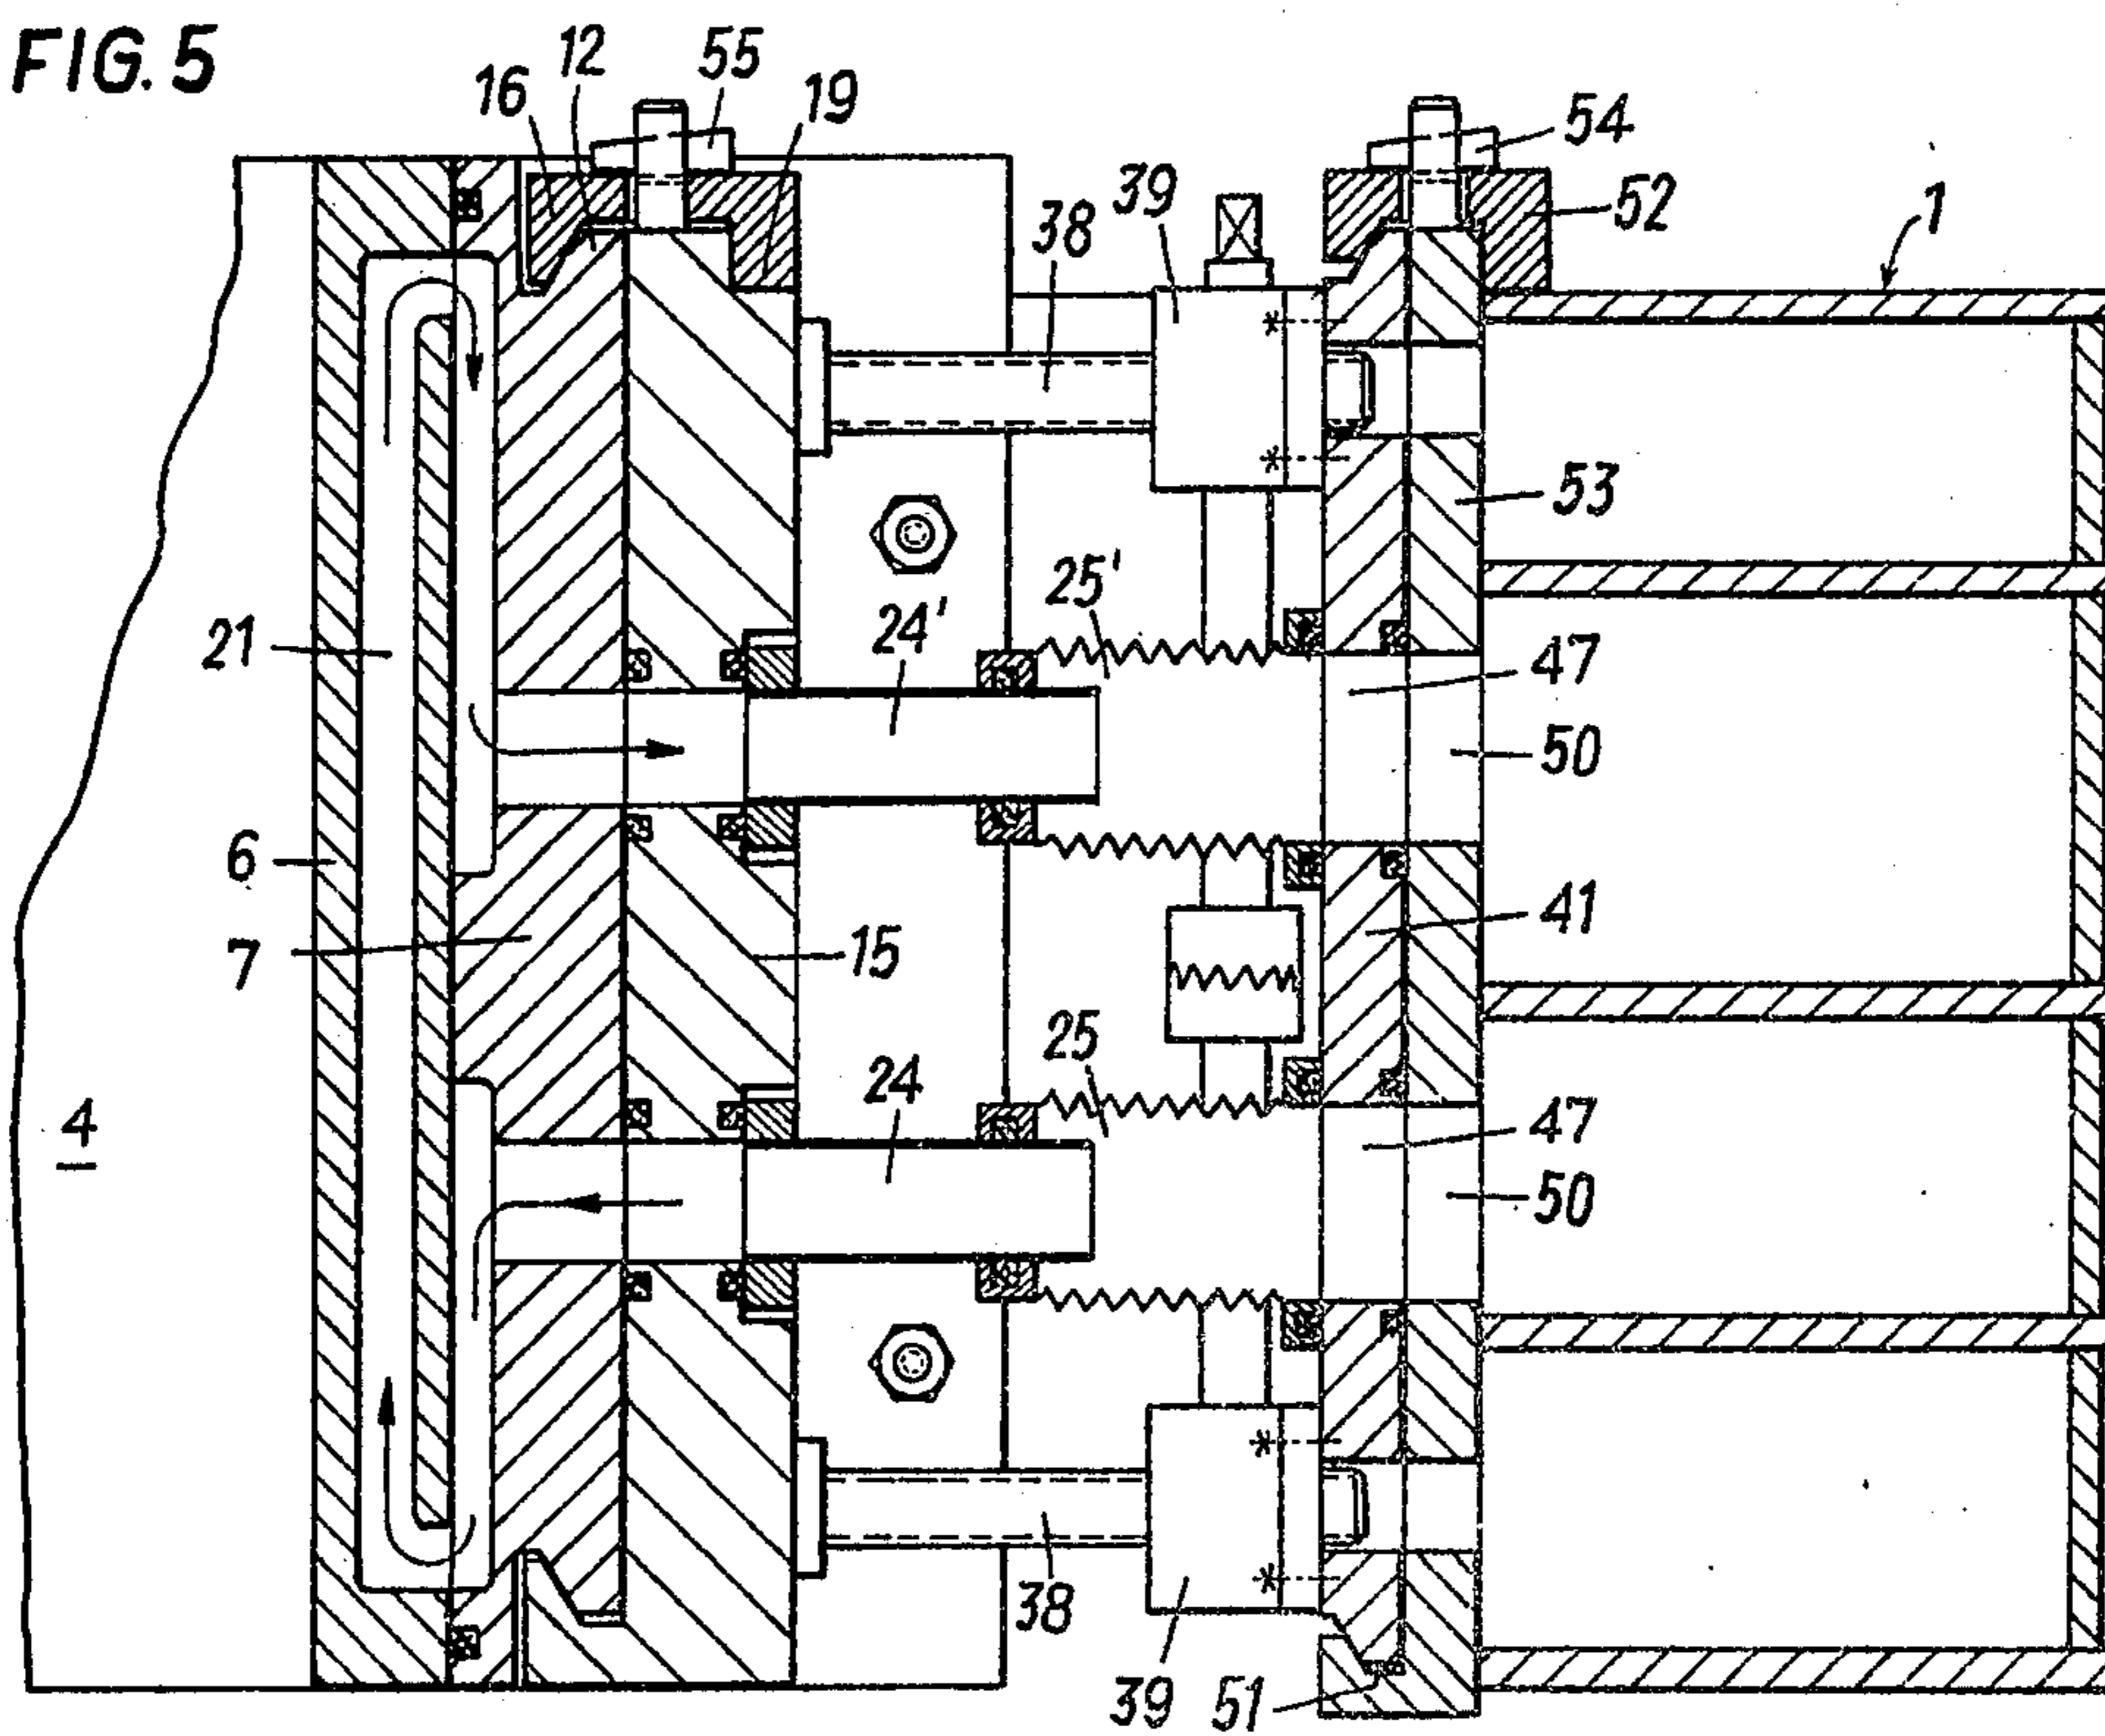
PLATE MOULD FOR CONTINUOUSLY CASTING STEEL STRANDS
